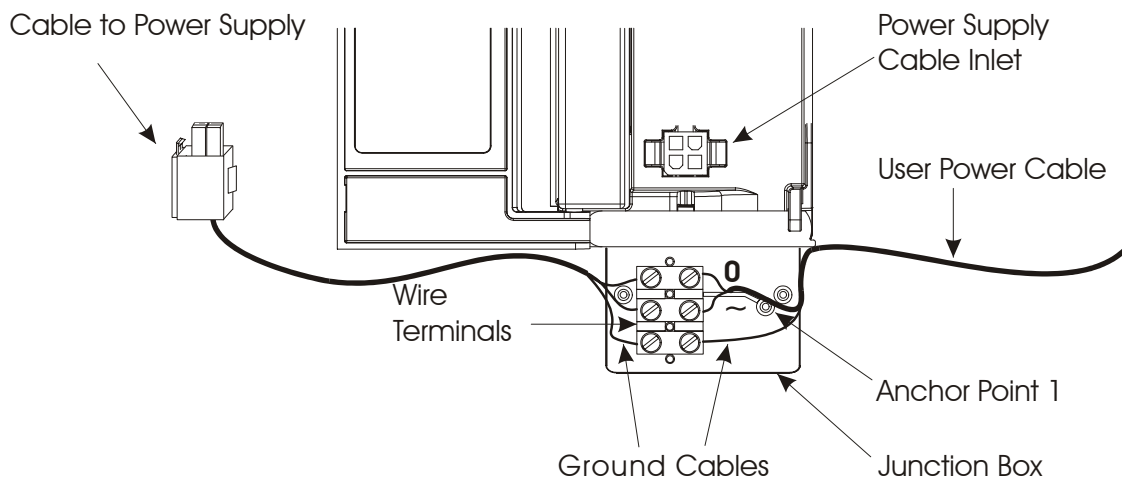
RTU Power and Ground Connections - No I/O Frame Installation
